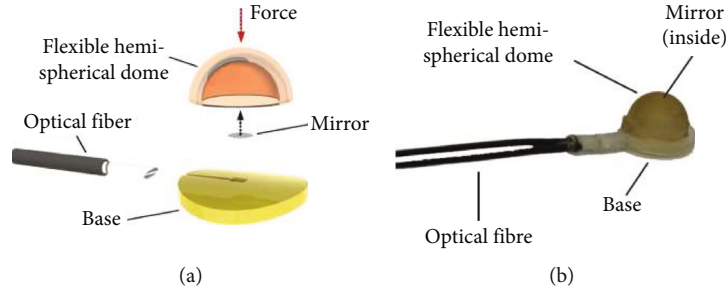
Tactile sensors developed by researchers at the University College London, (a) CAD drawing and (b) prototype of an assembled single tactile sensor [70].
